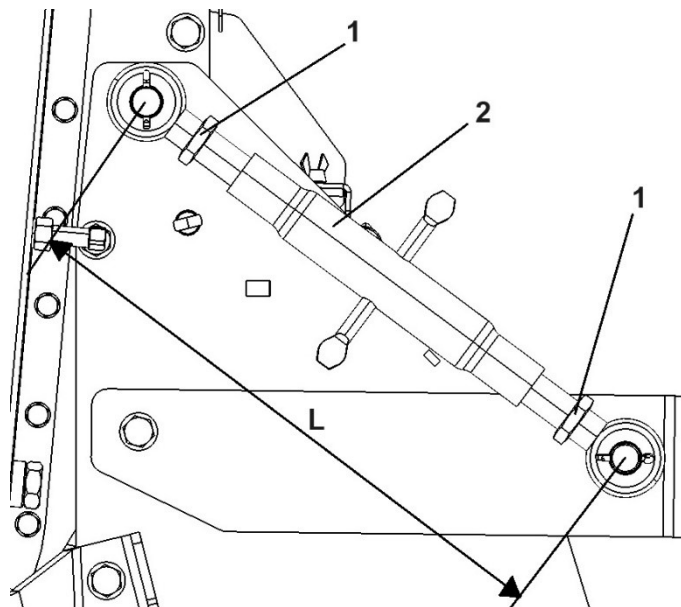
Working depth adjustment: 1 – lock nuts, 2 – adjusting screw body, L - distance between the centers of the two pins
